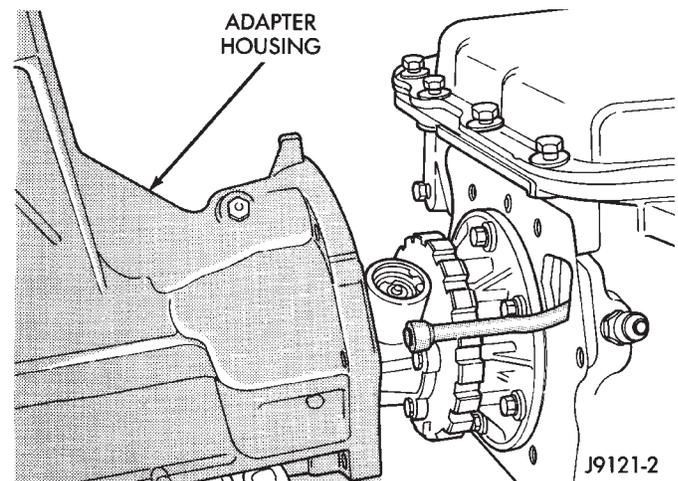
Adapter Housing Removal/Installation (4 x 4 Models)
